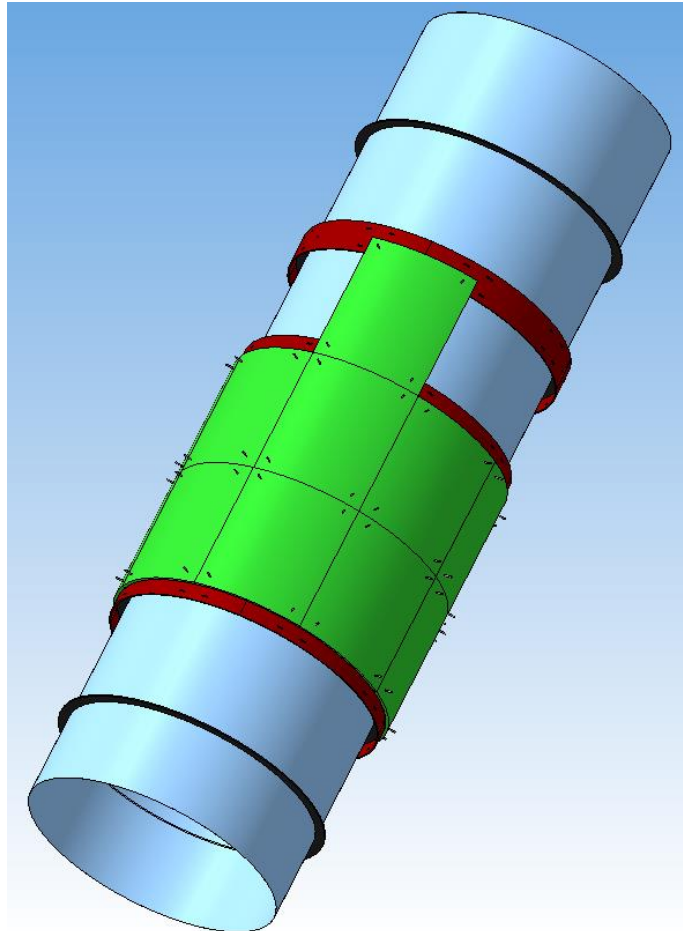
Cooling boiler thermal insulation (3D-model)
